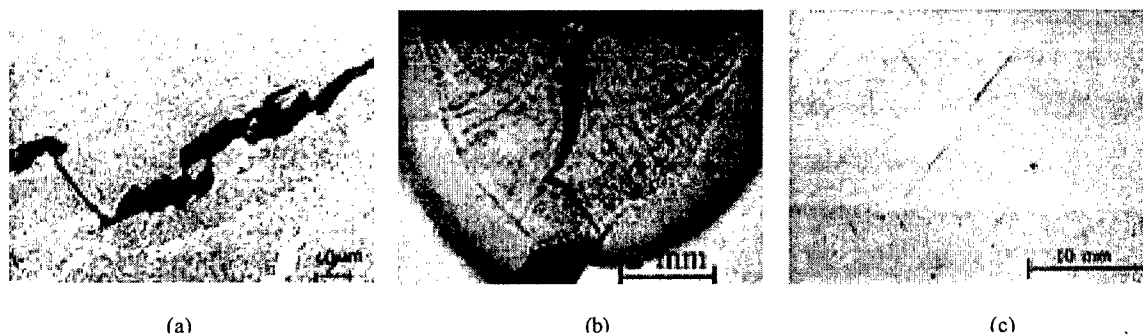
HAC in steel weld metal of (a) single-pass SMA weld, (b) root bead of a Y-groove welding test, and (c) SA weld [126].
